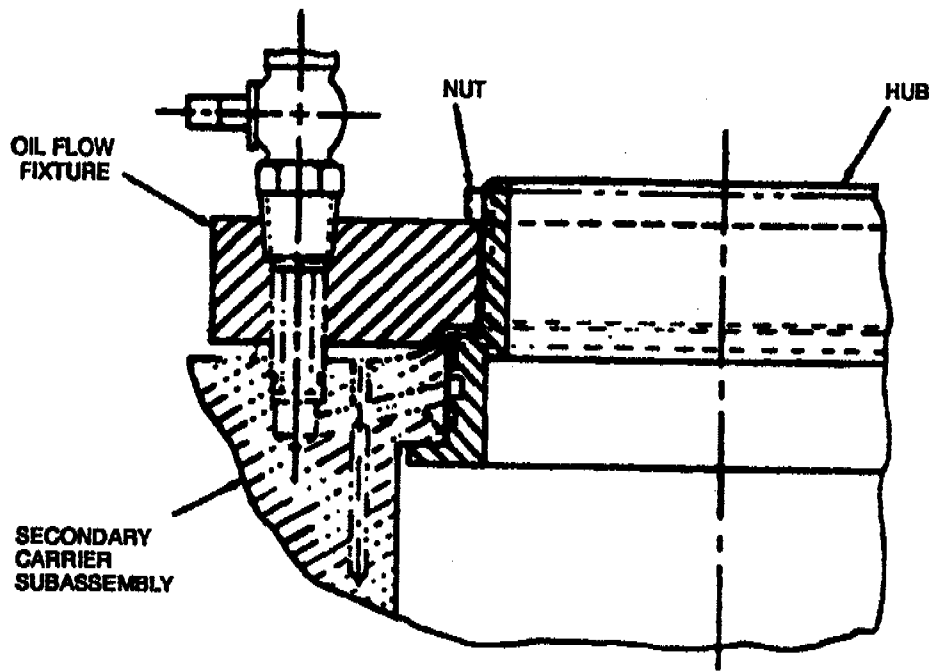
Oil Flow Fixture Installed on Secondary Carrier (T53-L-701, -701A).
